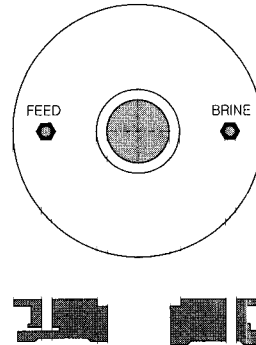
Drawing of rochem joining flange(top and cross sectional view).
